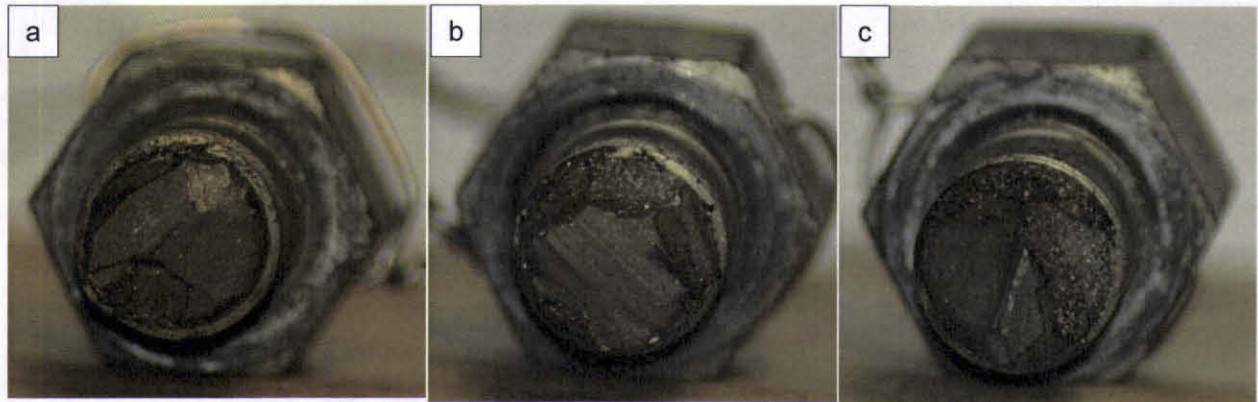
Picture of fractured bolts dismantled from propeller. a: Bolt 1, b: Bolt 3, c: Bolt 5, see Figure 2 and 3.
